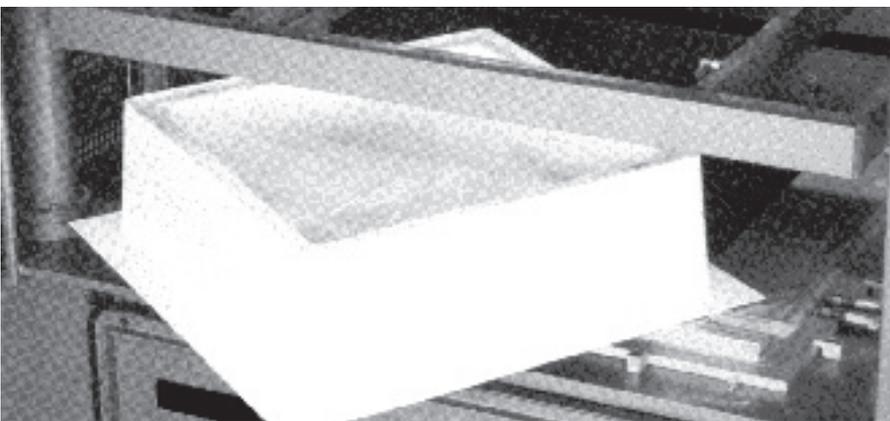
Thermoforming a shower basin on a vacuum-forming machine
